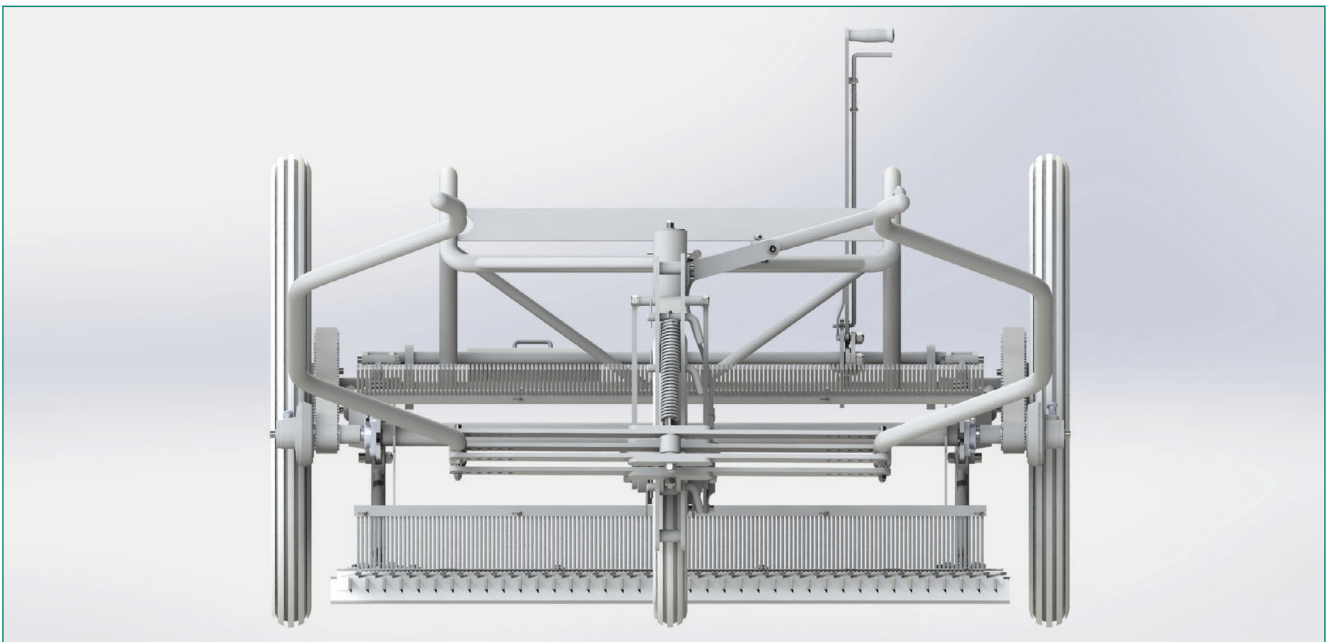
Front view of the horse drawn CombCut coupled to the forecart
